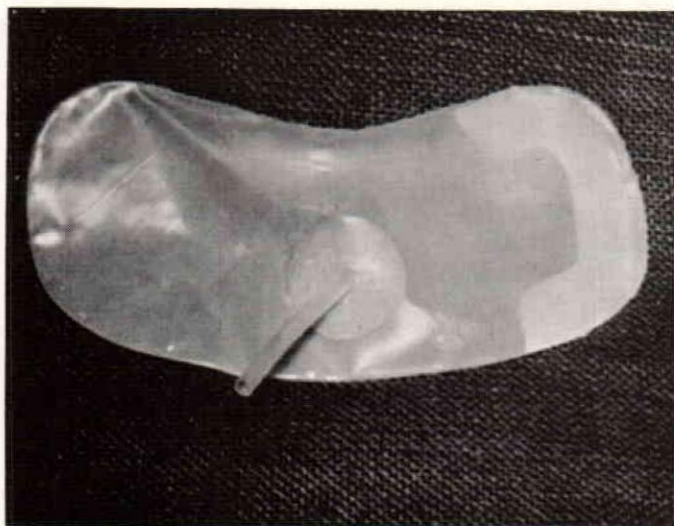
Placement of gusset to seal the open end of the bladder.
